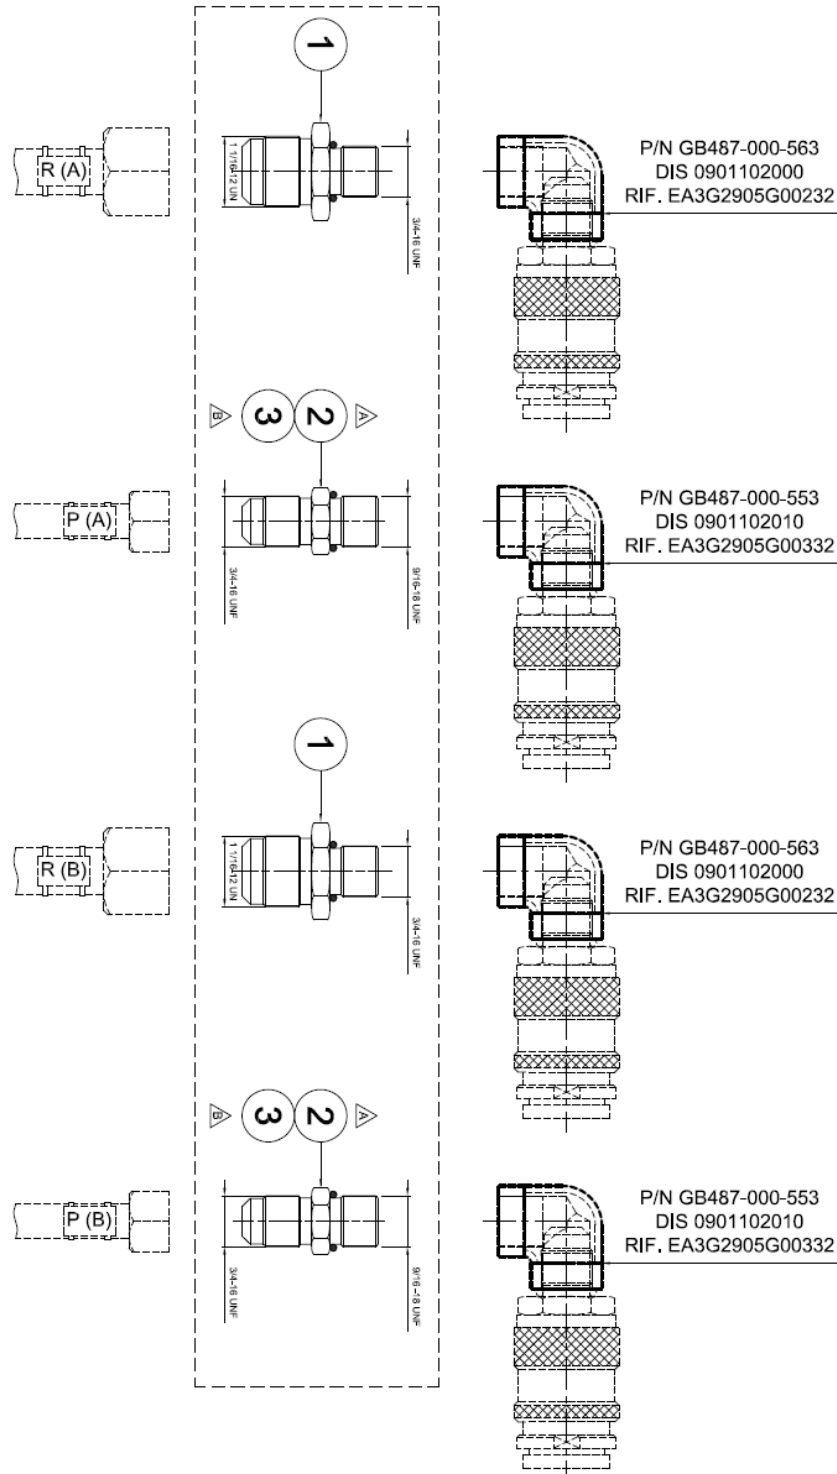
P/N GB487-000-570 interface adapter kit
